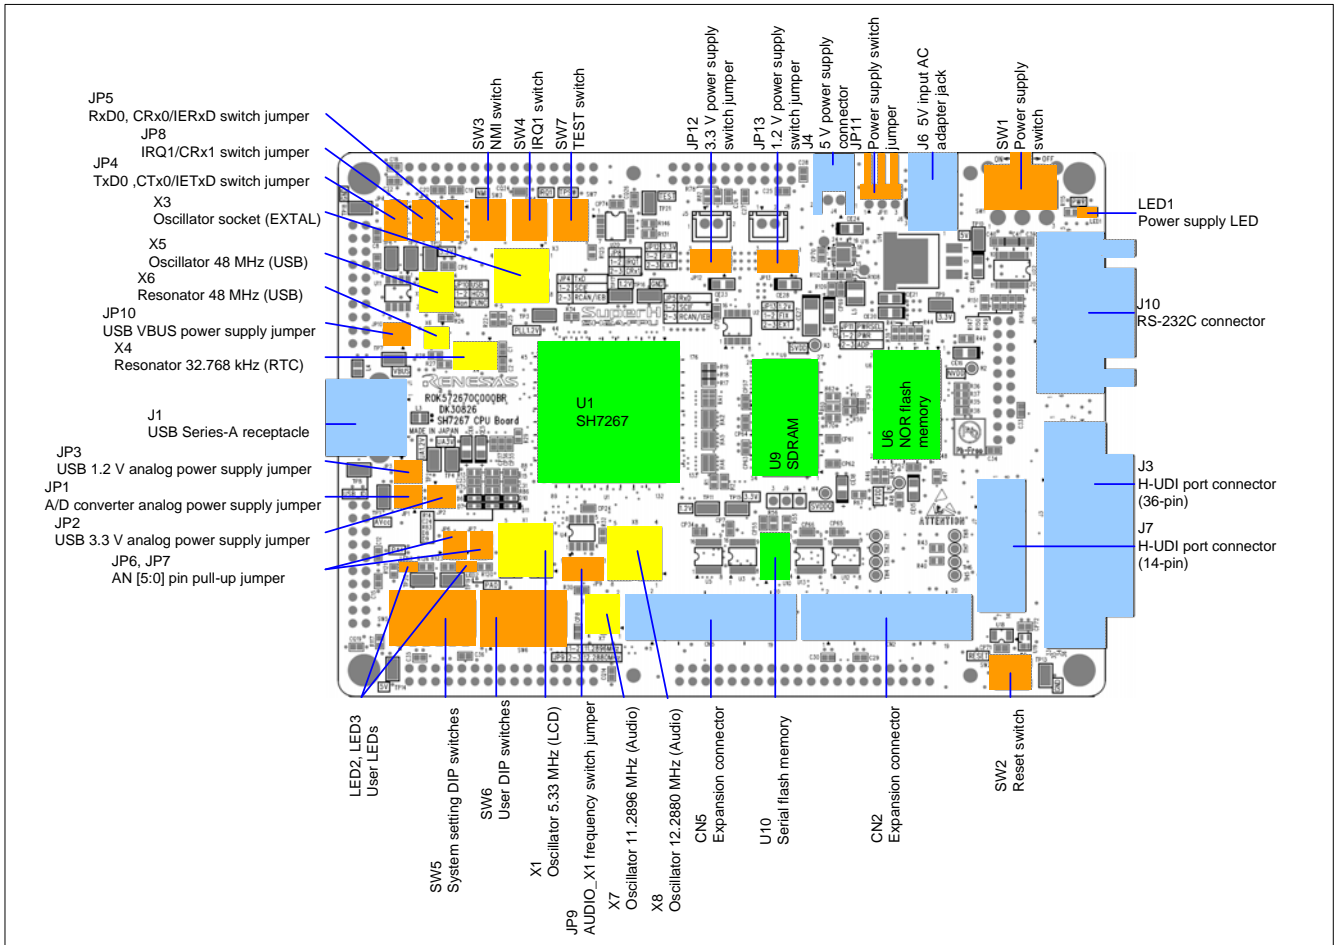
R0K572670C000BR Component Layout and Placement (Top View of the Component Side)
